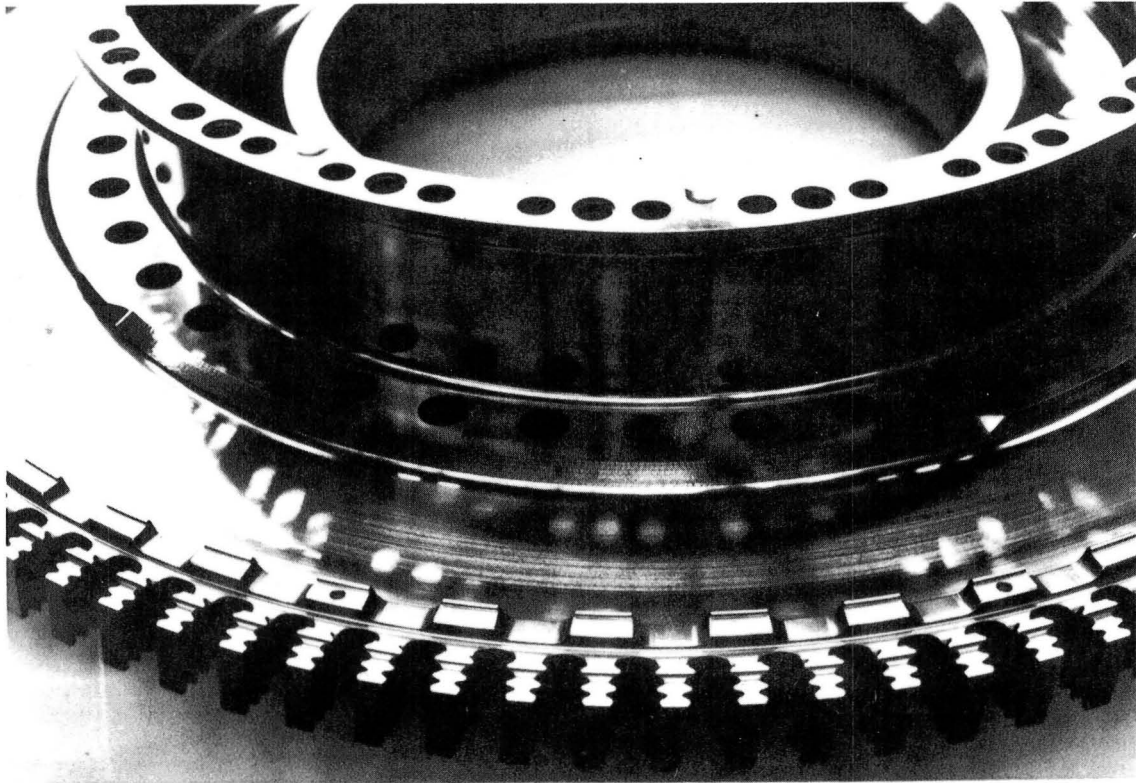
Finish Machined Disk Showing Tapered Bolt-Flange Face
